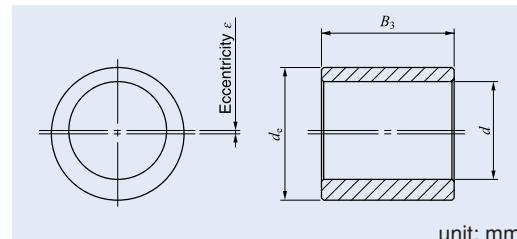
Length of the mounting hole of Eccentric Type Cam Follower
